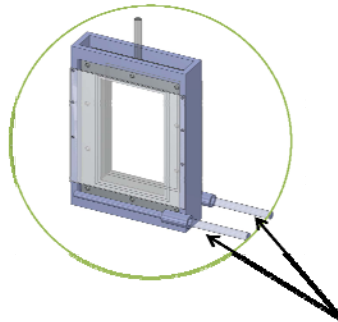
Sparging System (Arrows point to Sparging Tubes)
